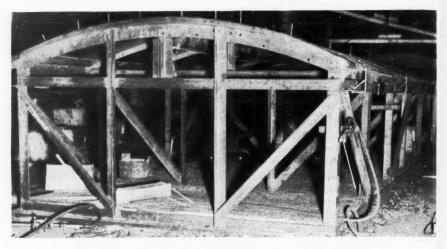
View Showing Roof Being Fitted and Tack Welded in Jig.
